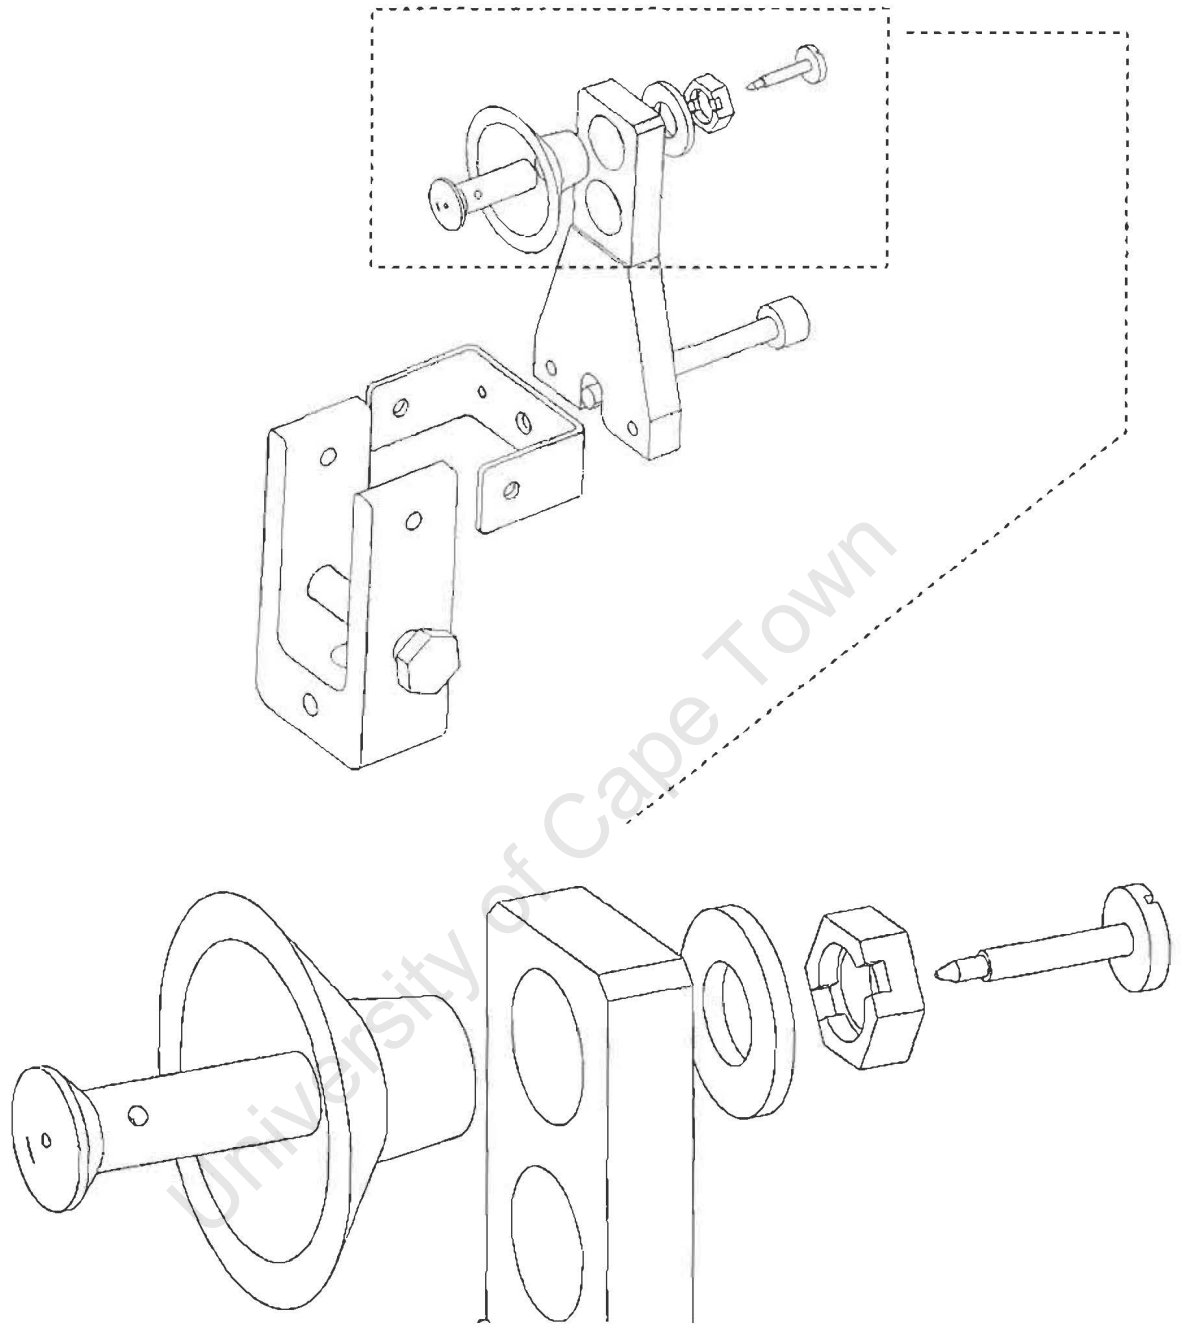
Implemented suction-cup and needle valve knee stop, (a) general layout; (b) exploded view showing detailed arrangement of parts
